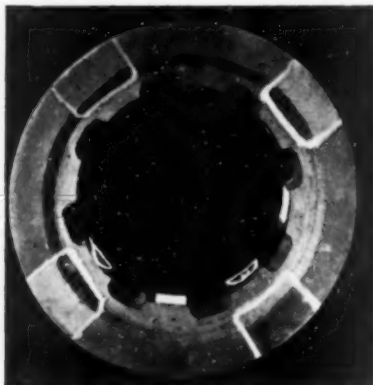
Top side of Casting shown in Fig. 12, showing large Risers extending into the register necessary to give adequate feeding on a chilled Casting.
